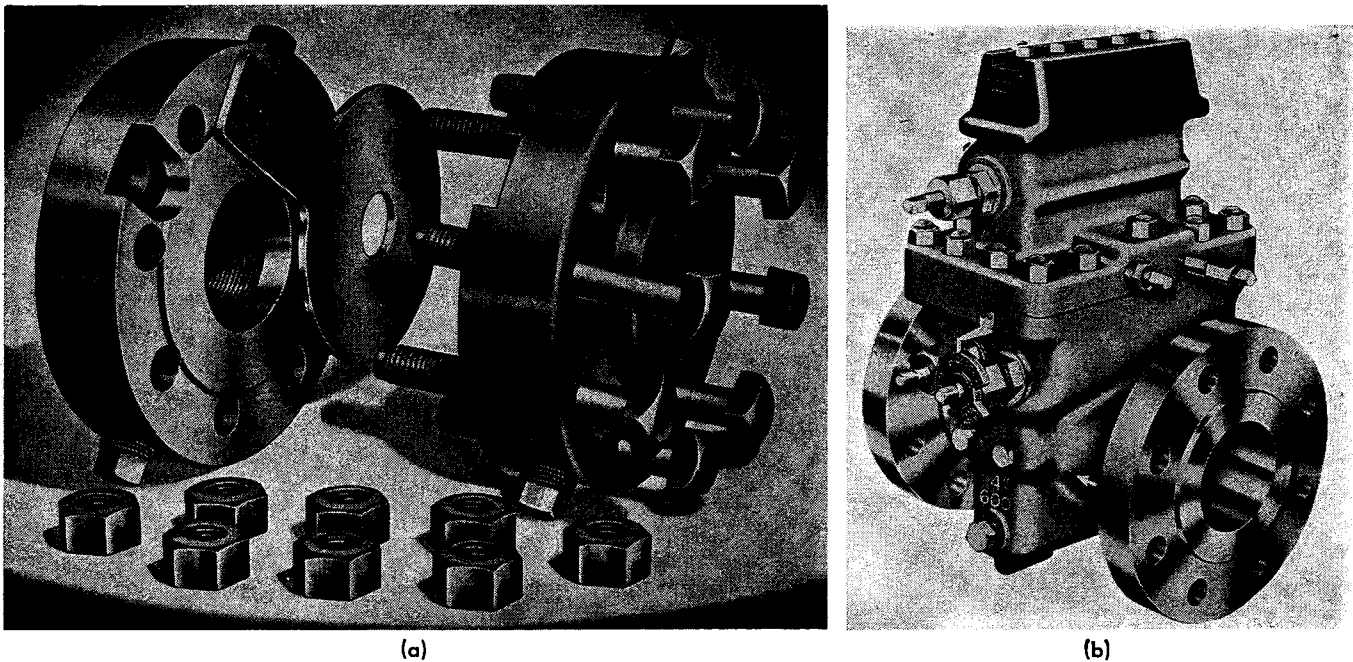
Orifice plates. (a) Standard plates. (Courtesy Foxboro Company.) (b) Orifice assembly permitting changing of orifices under pressure. (Courtesy Daniel Orifice Fitting Company.)
